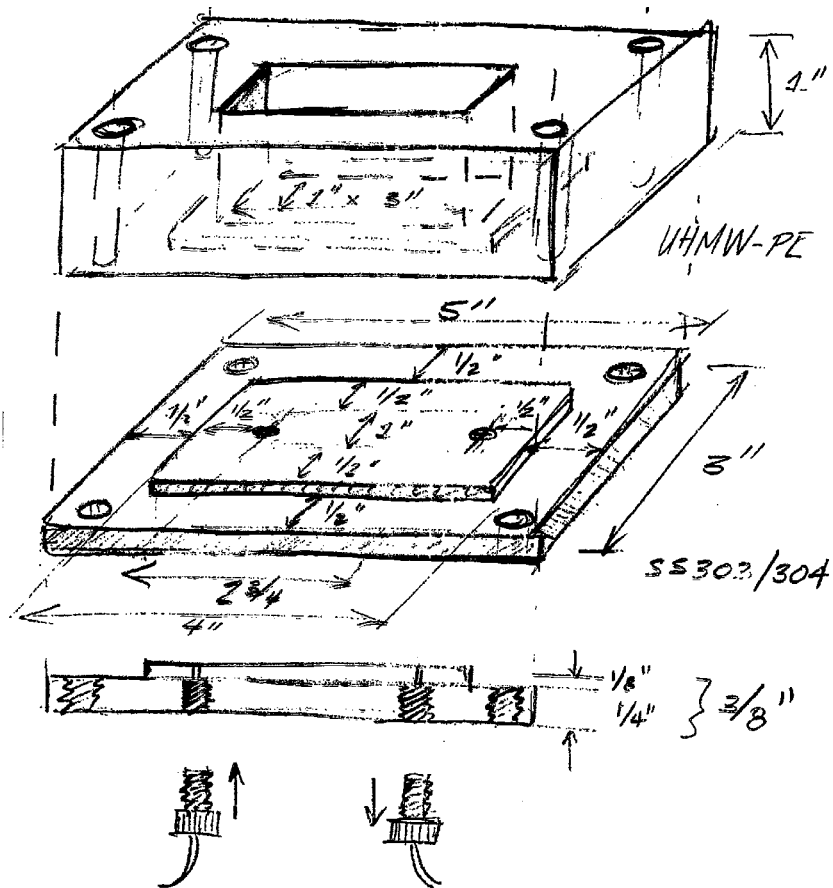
Second prototype sketch. Drawing made by ARS prior to fabricating the second prototype.
